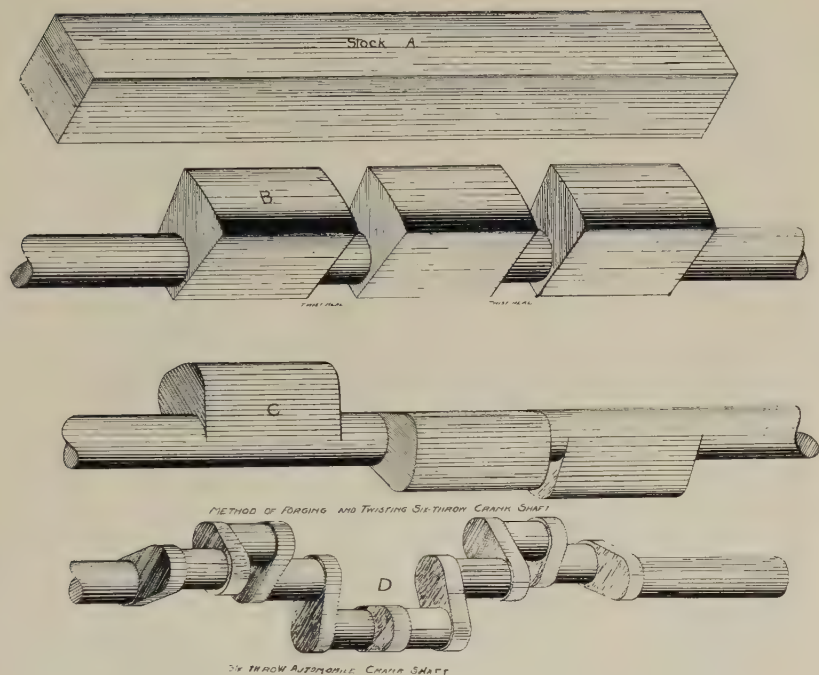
Illustrating Steps in Forging a 6-Throw Automobile Crankshaft.
